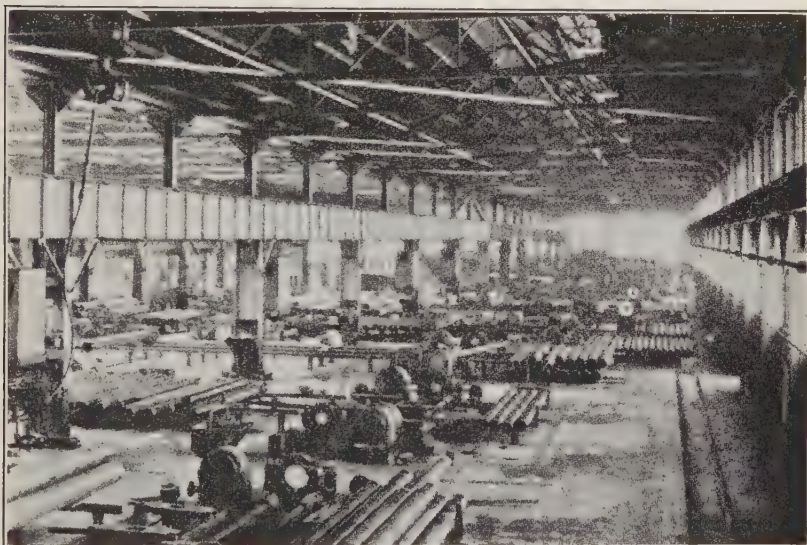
Lap-Weld Pipe Mill, Showing Good Safety Conditions
